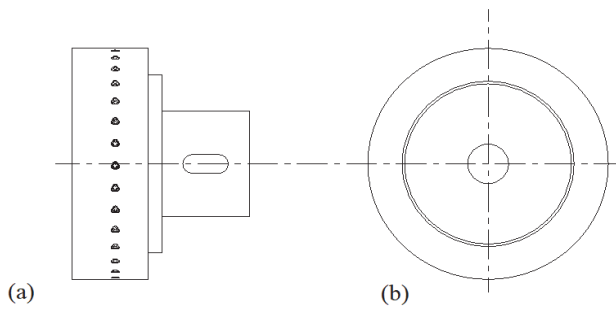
The structure of the seed-sowing wheel: (a) main view; (b) side view
